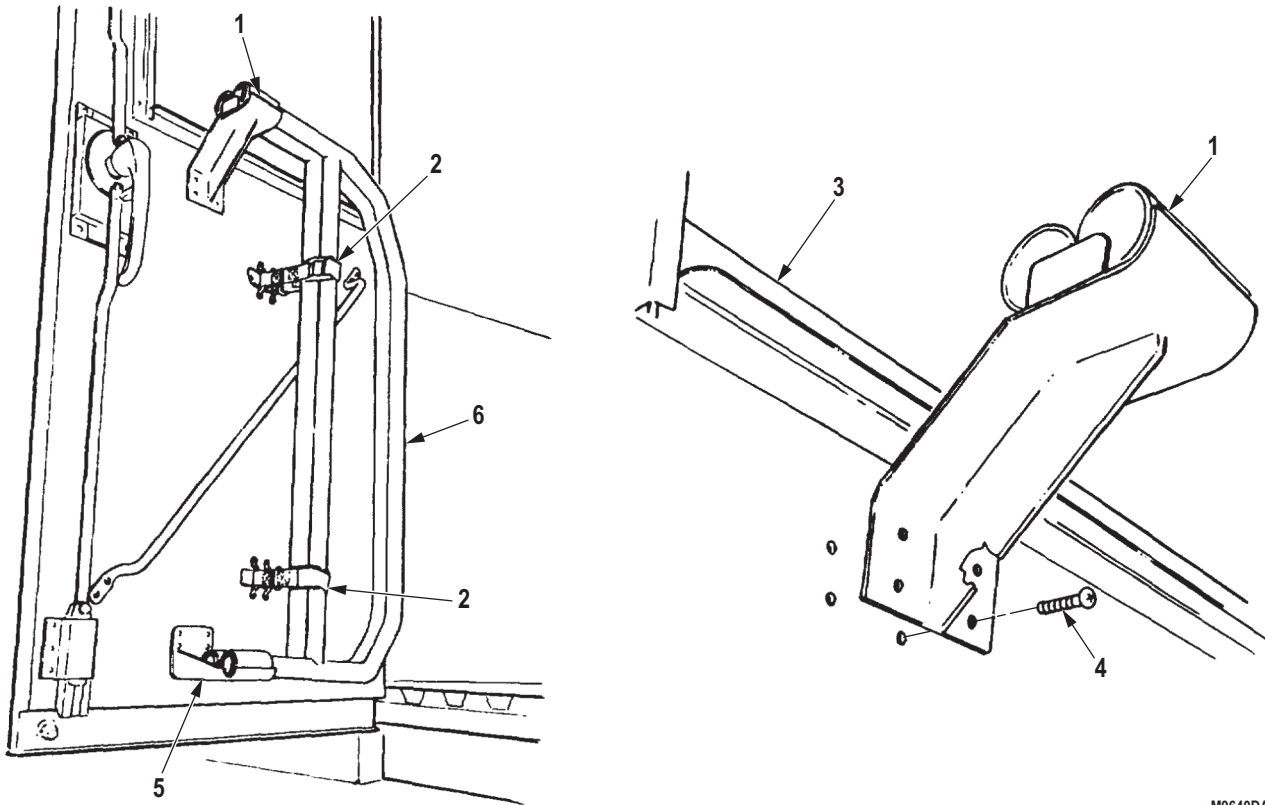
Van Handrail Component Installation (M934/A1/A2).
